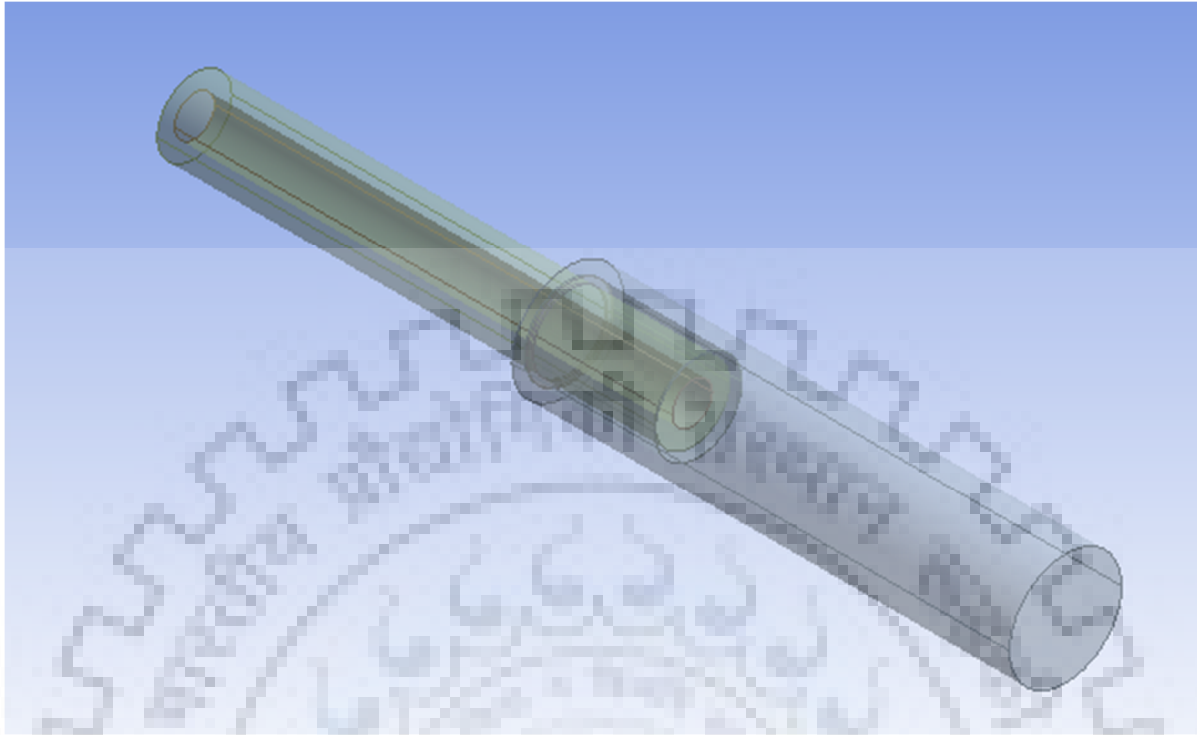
Isometric view of tool engulfed inside workpiece at depth 10 mm
